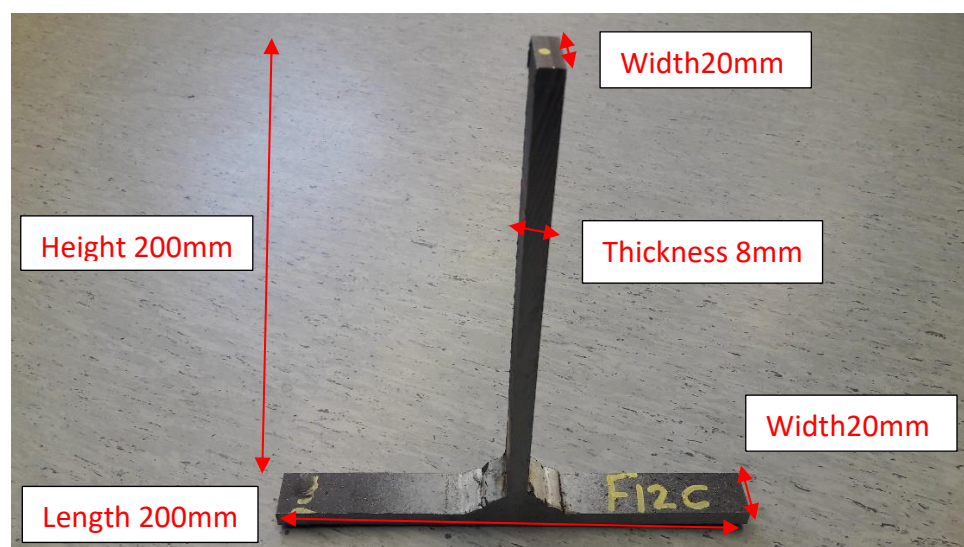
Example of Dimensions of the samples created. Sample not used during test. The sample presented in the figure has fillet weld on both sides of the plate. In the test, the fillet weld was only on one side.
